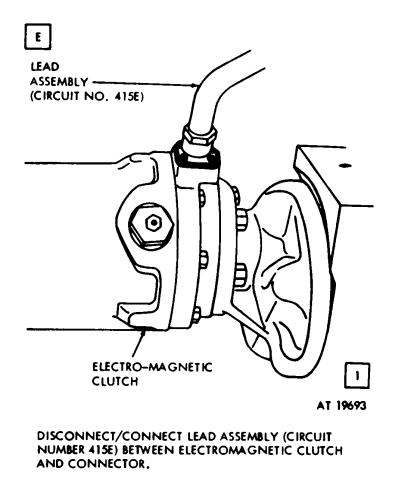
Removal or installation of electro-magnetic clutch electrical system (sheet 3 of 3).
